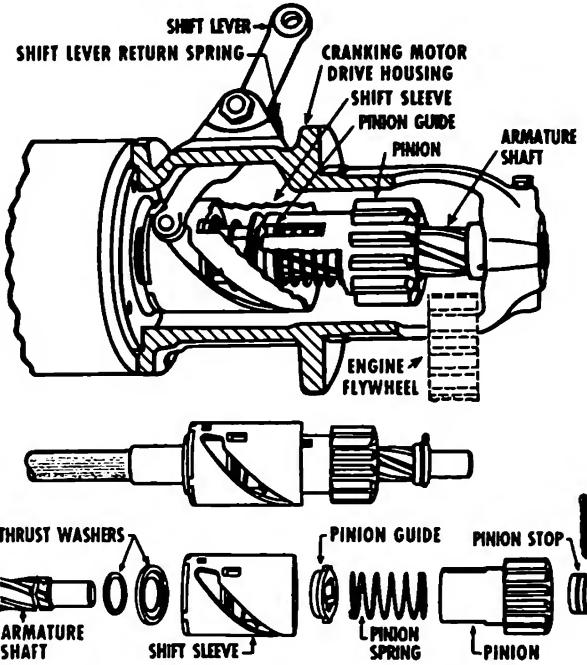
Dyer drive assembly. Lower view shows exploded view of component parts
